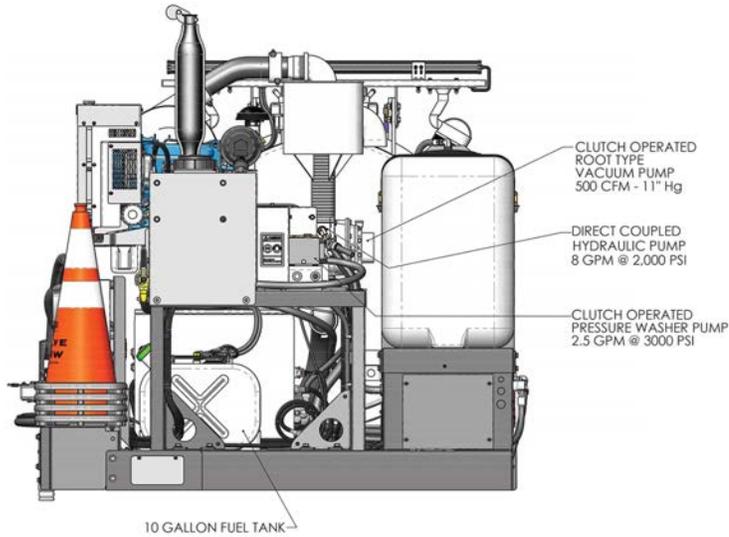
The drawing shows the front view of the Standard LX diesel engine configuration, 77-000-54.
